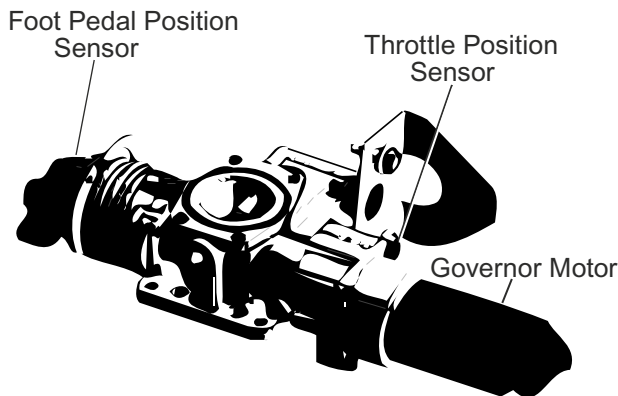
Throttle Control Device “Drive By Cable Throttle Body Assembly”
